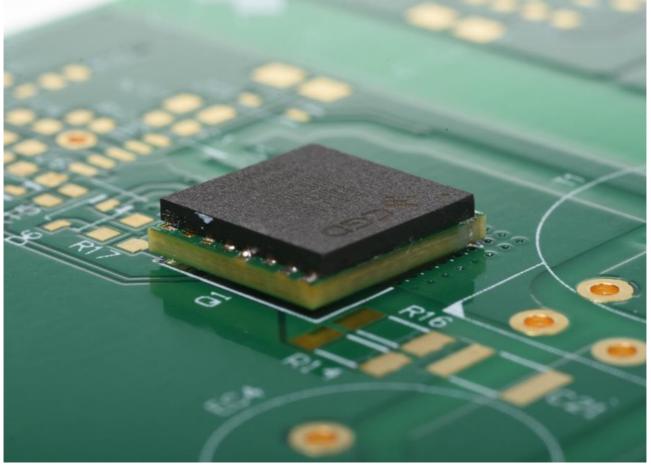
AIB Mounted to a Recipient PCB Assembly
